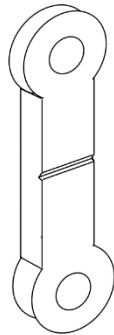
Illustration of a Fatigue Crack Initiation Test Specimen
